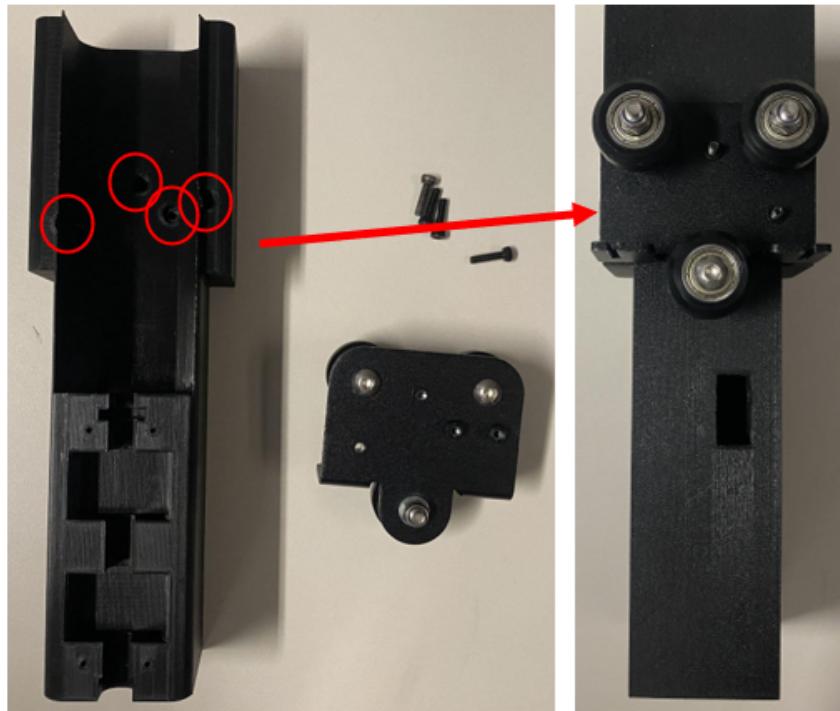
Syringe Pump Base attachment to Syringe Pump Holder
